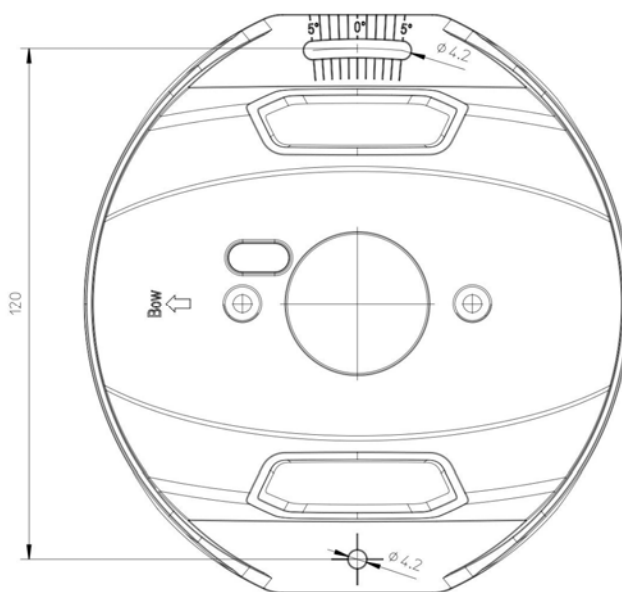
ROOF MOUNT INSTALLATION STEP 2 (MEASURE AND MARK THE INSTALLATION HOLES)
